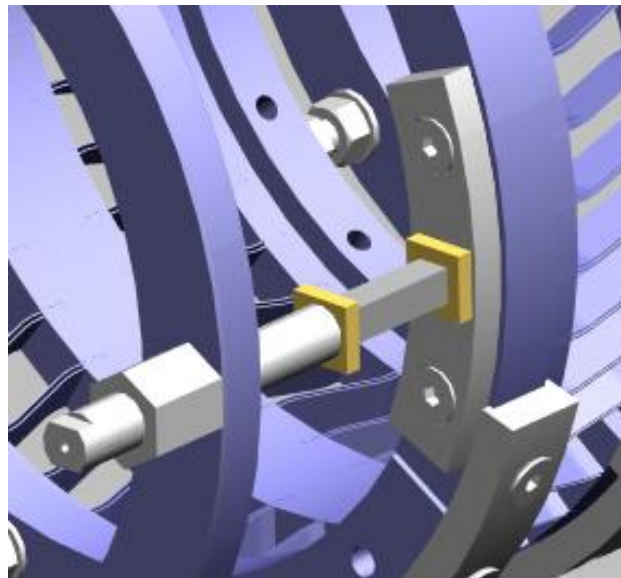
detailed view of piezo integration in the Blade Tuner
